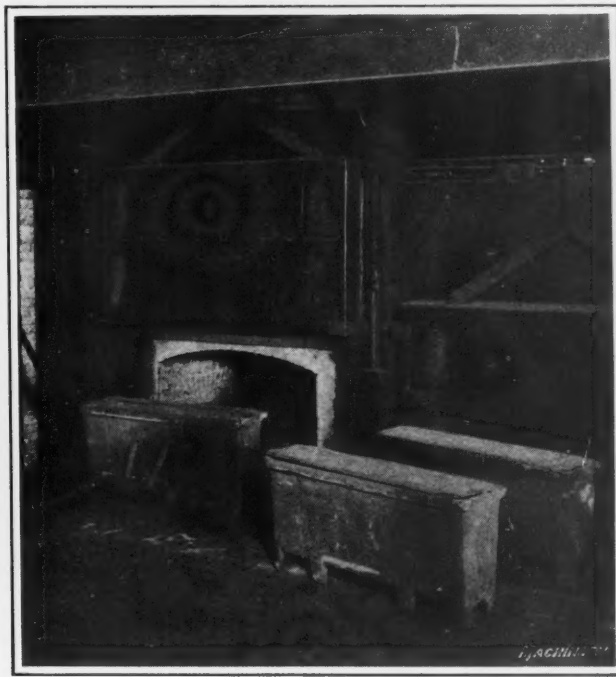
Carburizing Furnaces and Boxes in which Crankshafts are packed
